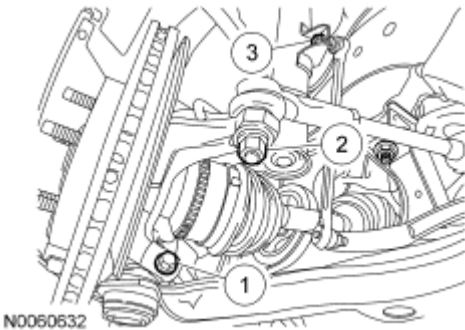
Identifying Bolt, Nut And Stabilizer Bar Link
